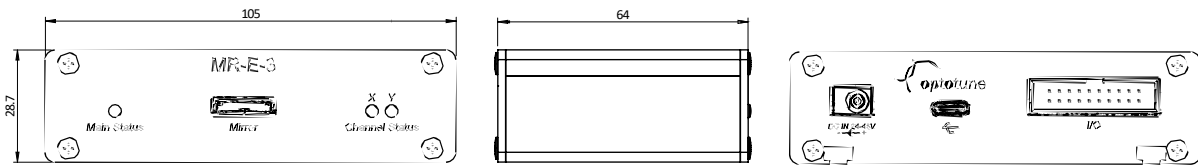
Mechanical drawing of the MR-E-3 base unit (unit: mm).
